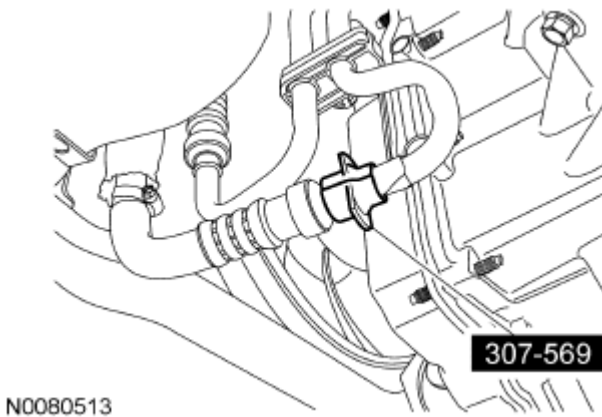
Disconnecting Transaxle Fluid Cooler Tubes
